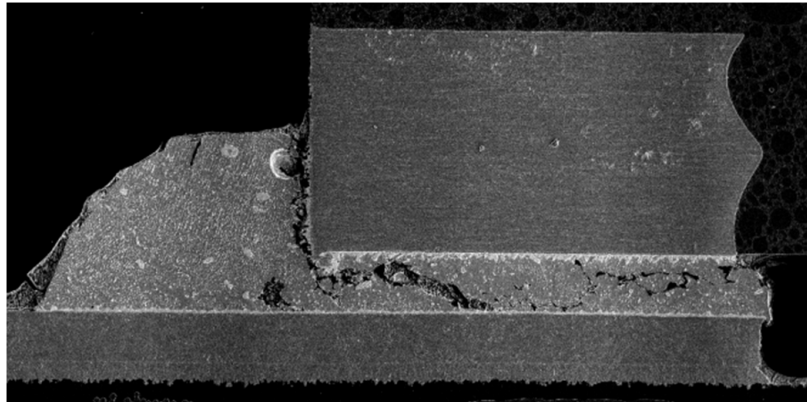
Schematic of an assembly cross section showing sensor-solder-PCB subassembly.
